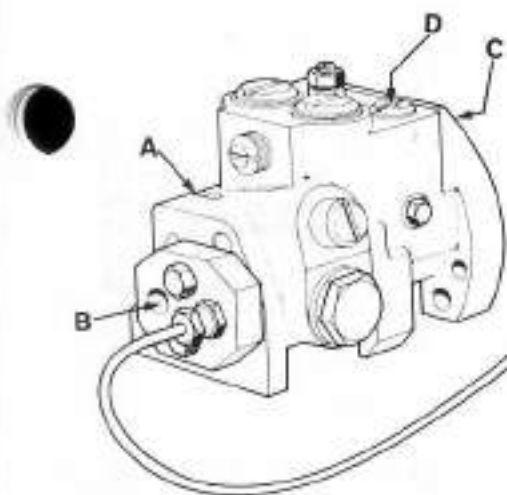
View showing adapter connecting pressure line to control valve assembly. Very slight leakage from valve openings is normal. If excessive leakage shows at any of the openings (A, B, C or D), refer to text for location of faulty valve.
